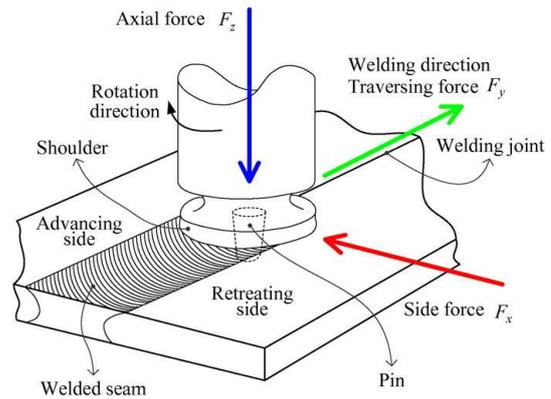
Schematic of the butt turbulent friction stir welding process [12]
